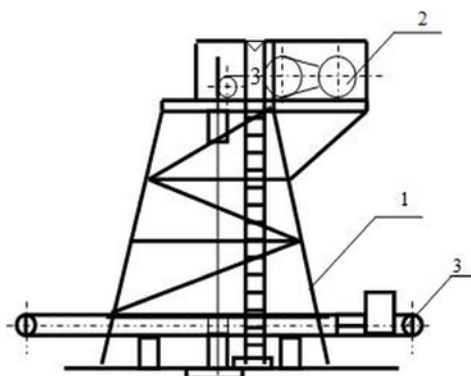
Side view of the existing structure of test equipment 1 – Tower (mast), 2 – reel device of ram, 3 – belt conveyor
